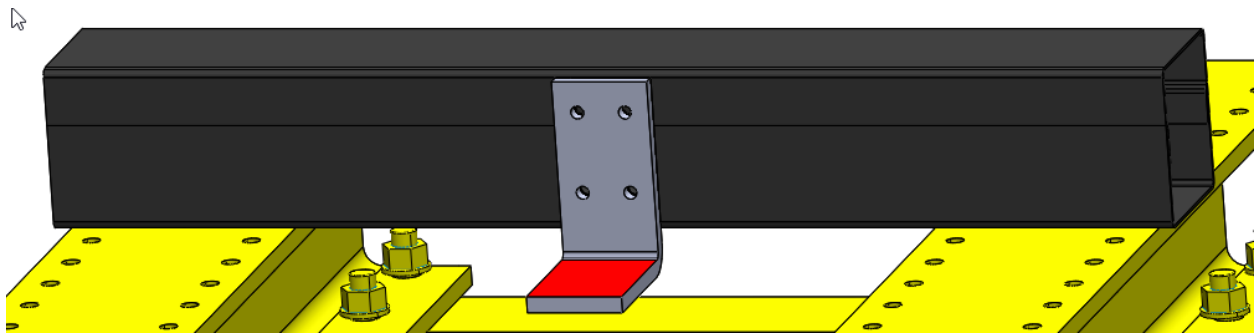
Composite prototype gantry mounted in the testing structure and the L-shaped steel component where the load was applied (red area)
